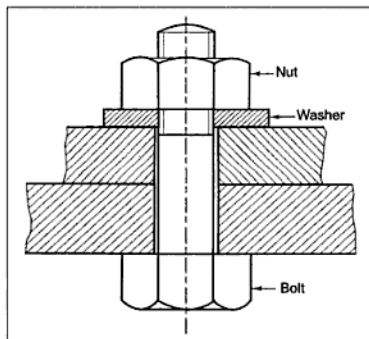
Sectional Front View of Nut, Bolt and Washer in Assembled Position
